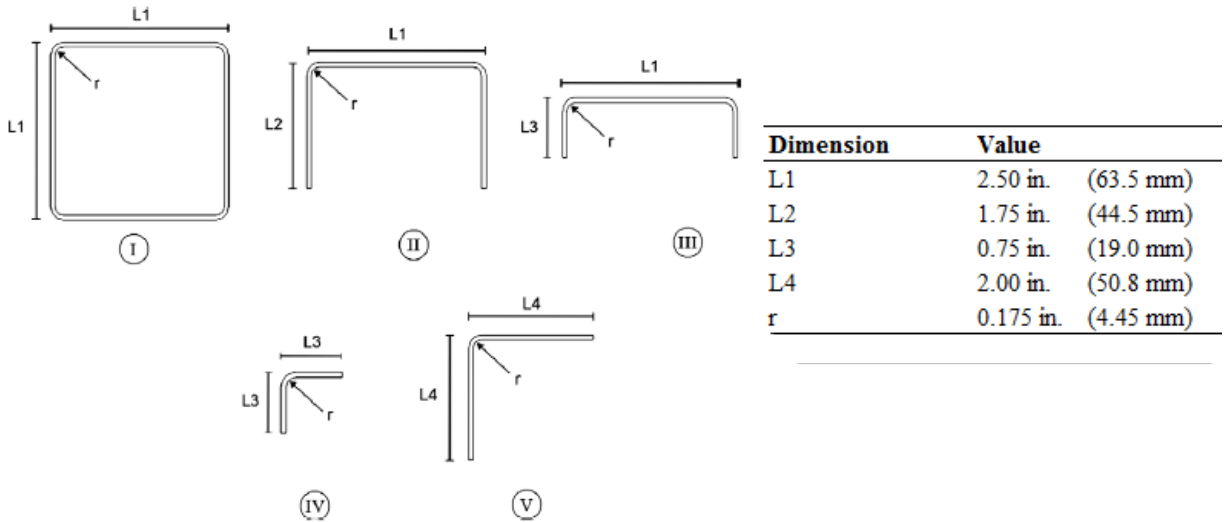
Five channel geometries and dimensions (I) tube, (II) large C-channel, (III) small C-channel, (IV) small corner, and (V) large corner
